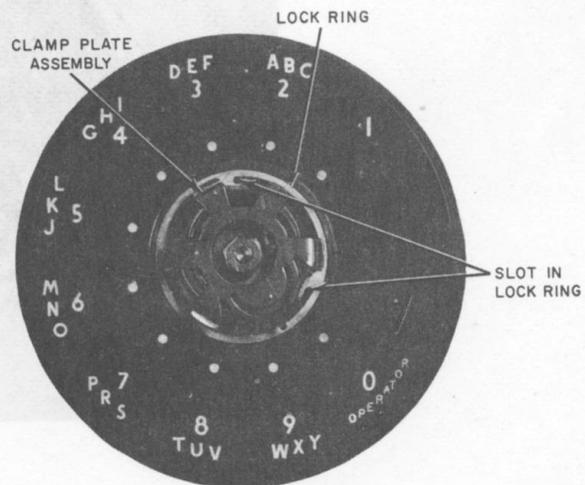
Fingerwheel and Finger Stop Removed to Show Lock Ring
